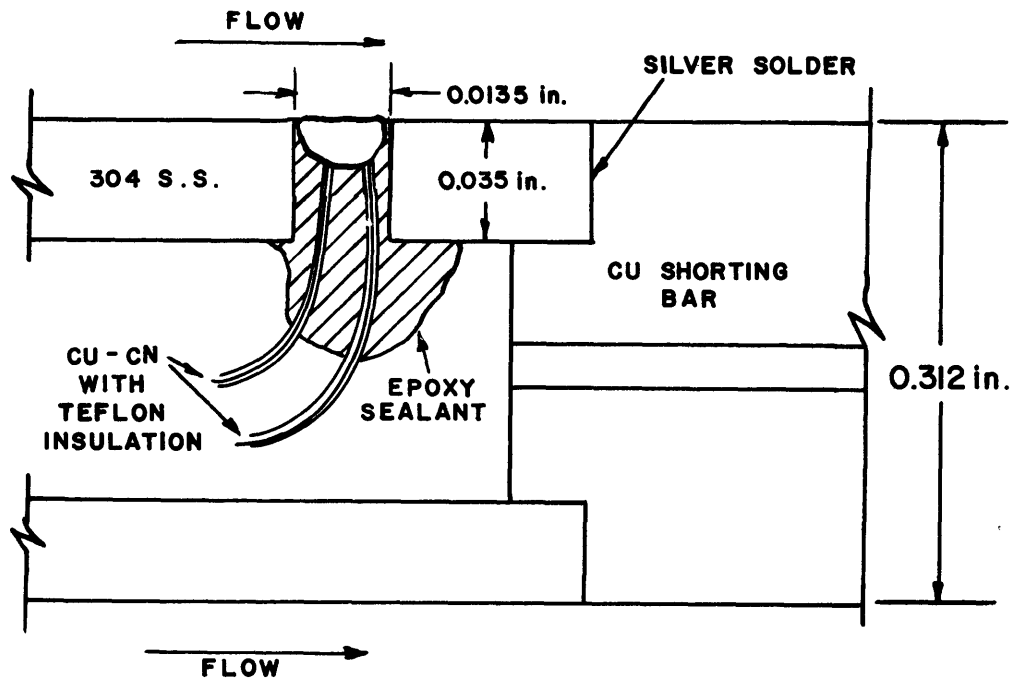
DETAILS OF WALL THERMOCOUPLE CONSTRUCTION
